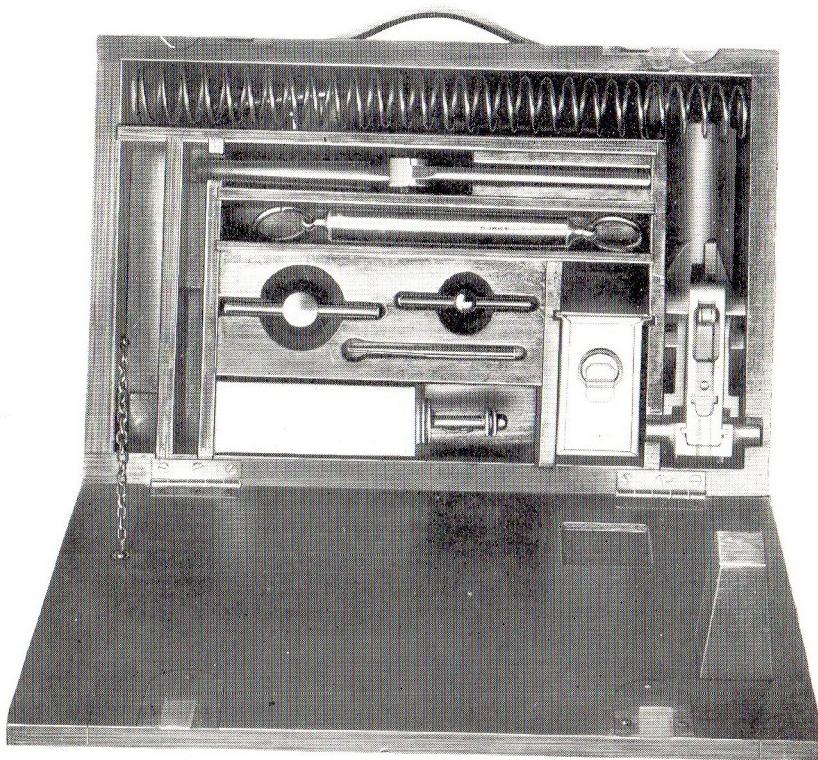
Box for Tools, Spare Parts and Accessories.
